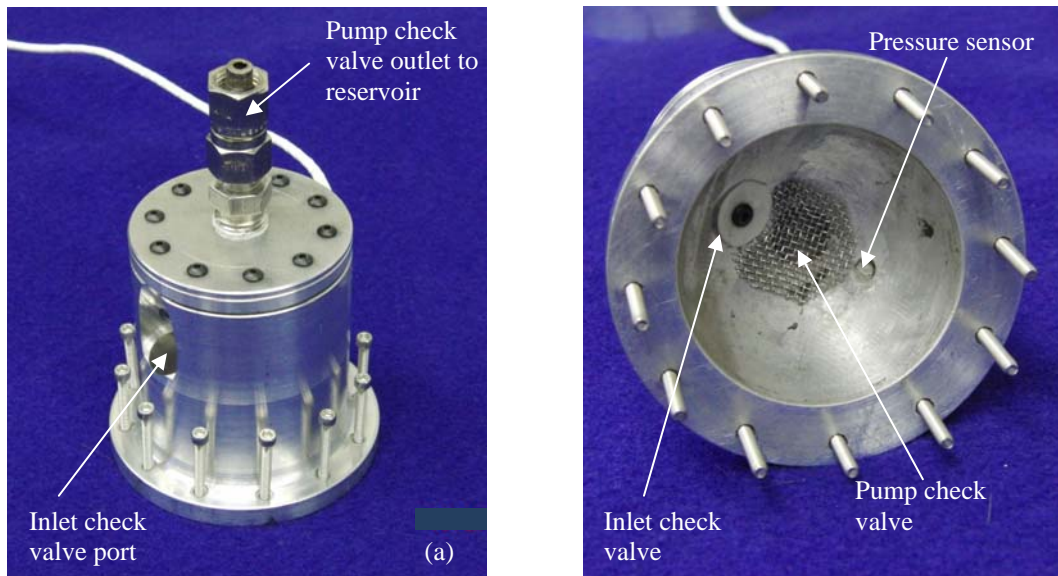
a) Compressor section. b) Interior view of compressor section.
